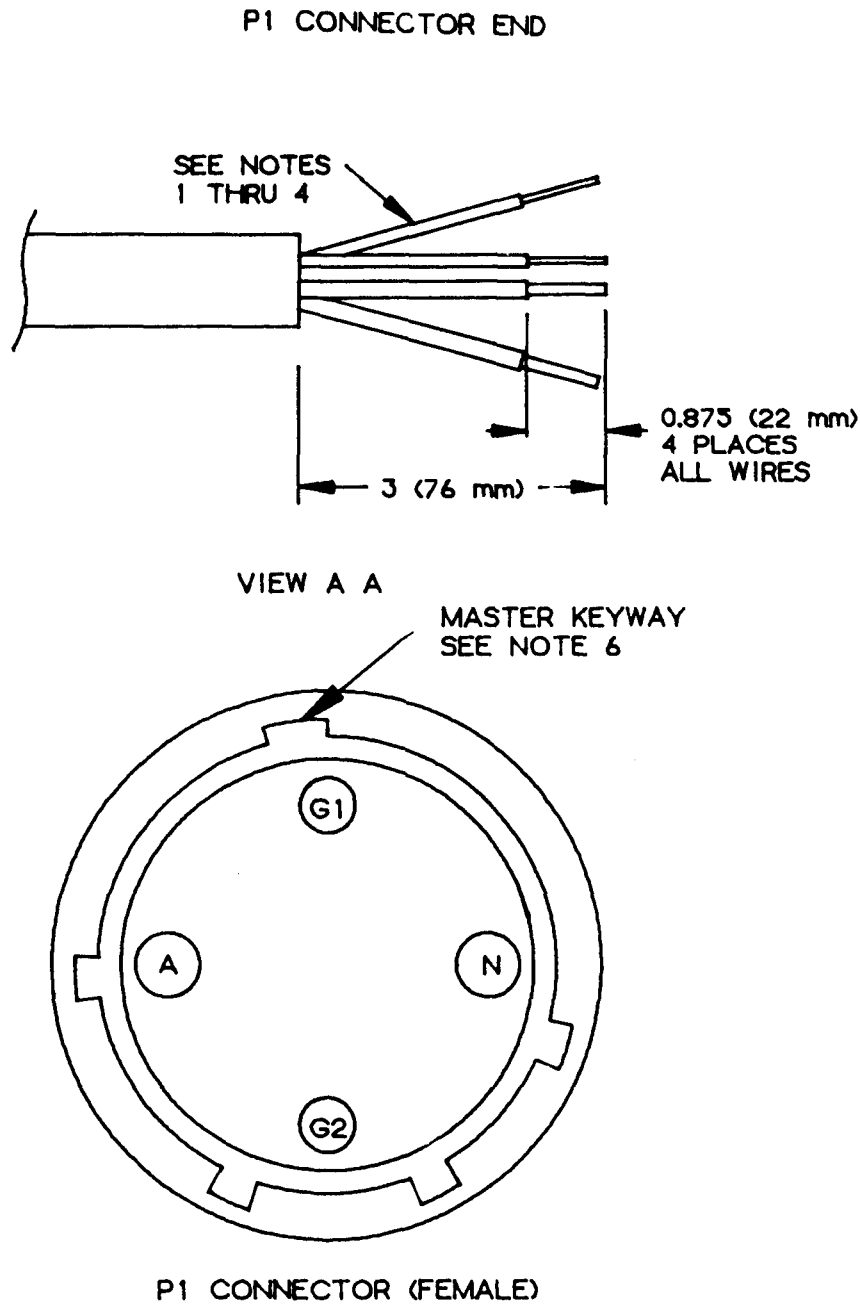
60-amp, 4-ft (1.2m) pigtail cable. (sheet 2 of 3)
